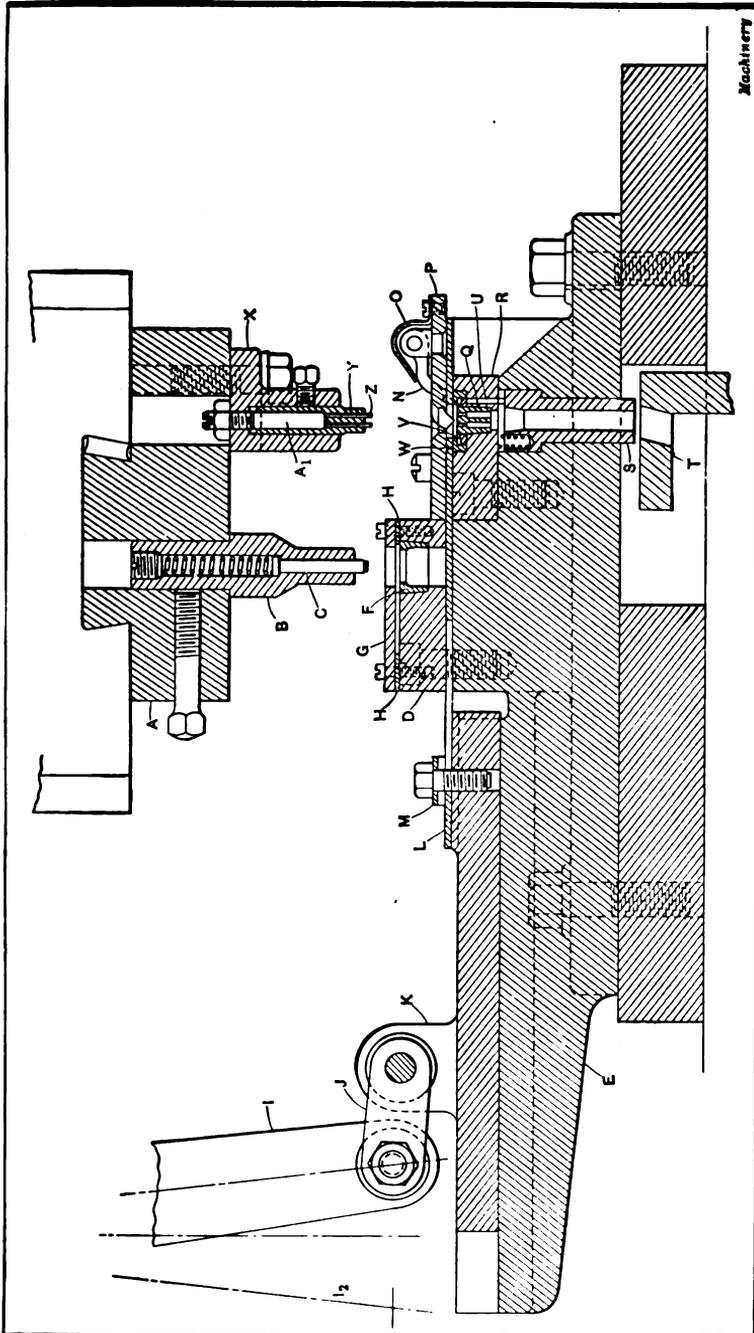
Cross-sectional View of Button Back Blanking and Piercing Punch and Die
